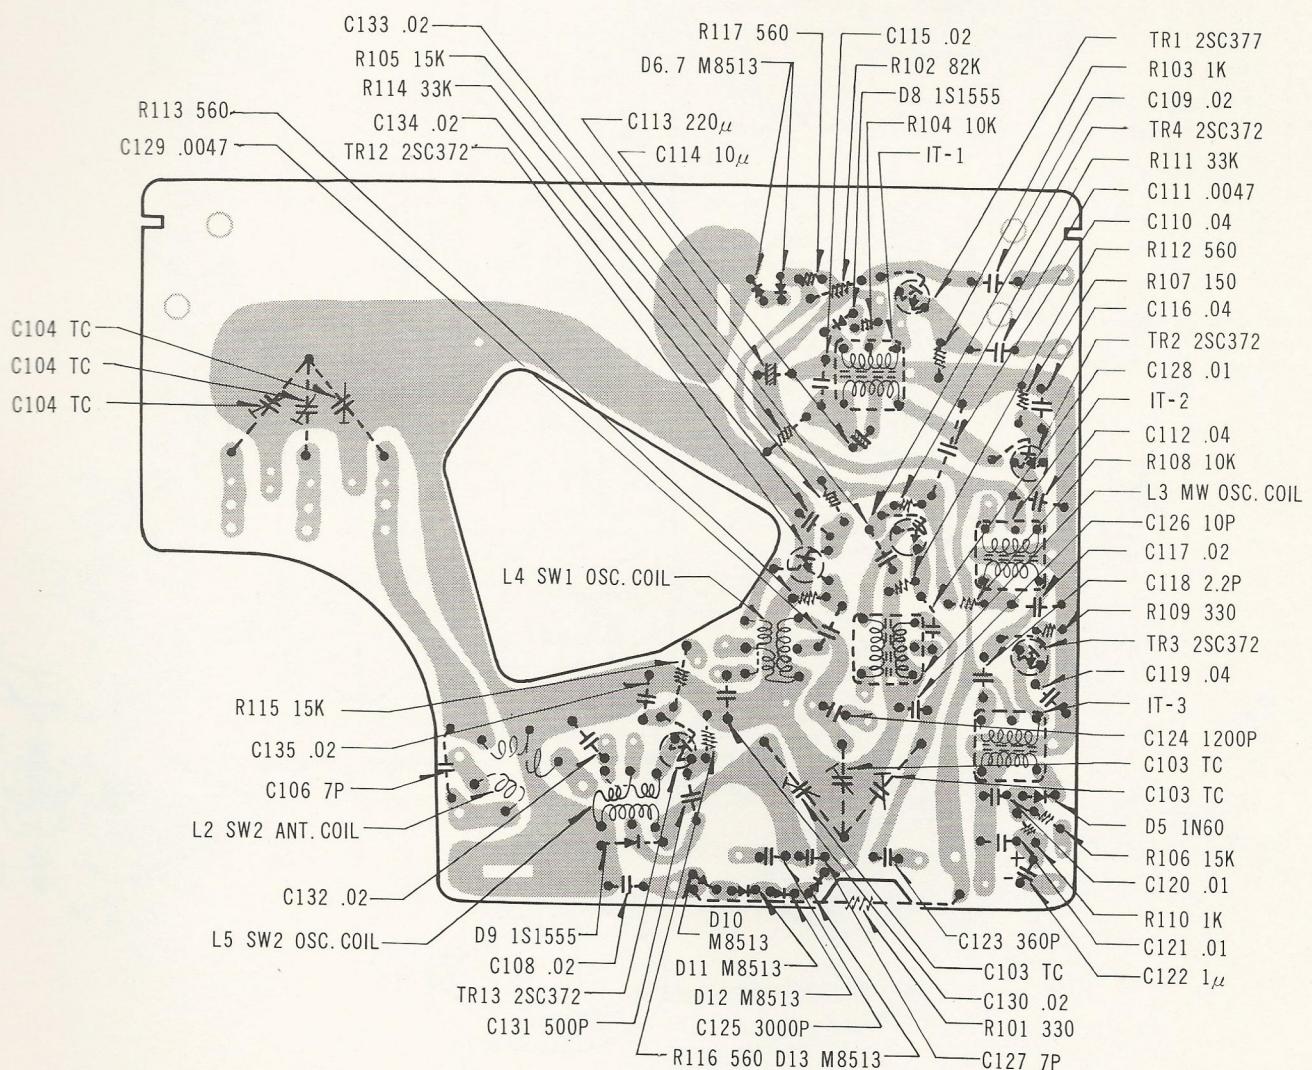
BOTTOM VIEW OF CHASSIS TUNER SECTION
